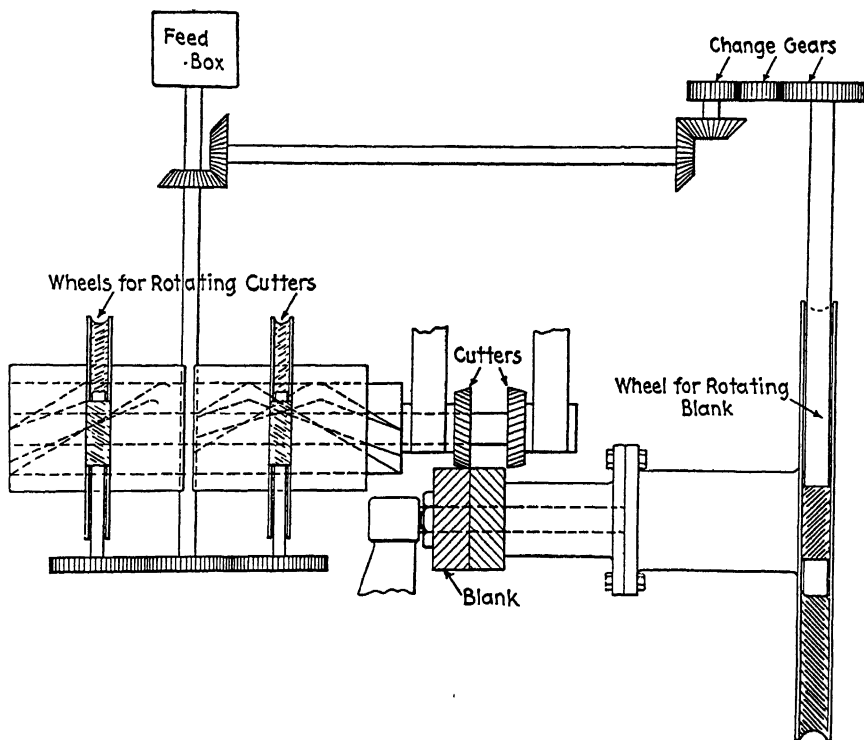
Mechanism for Cutting Sykes Gears.
